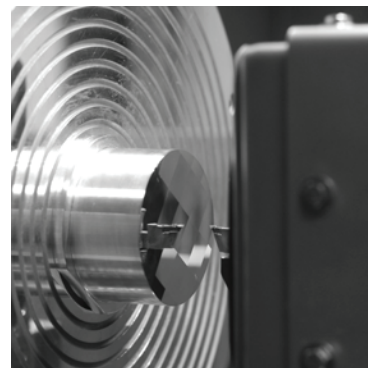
Machining of a faceted mirror using a long stroke fast tool.
